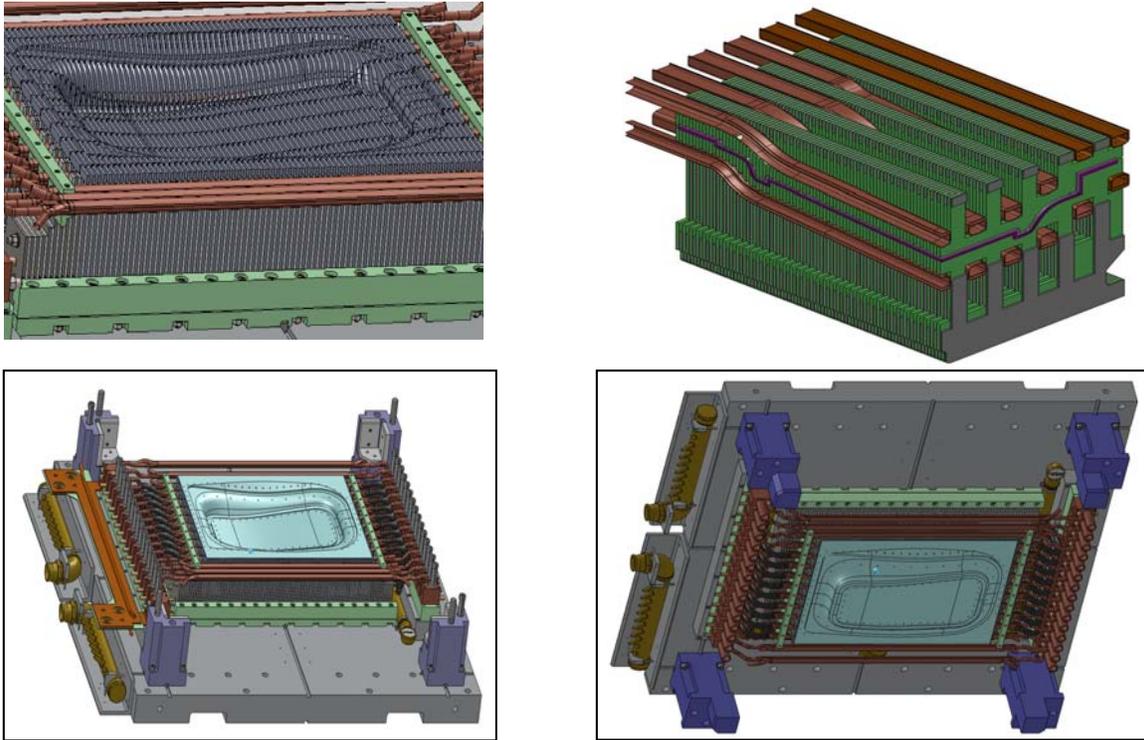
Boeing seatback tool design showing the induction coil, the stainless steel tool body laminations, the smart susceptor shells, and the die shoes for easy handling
